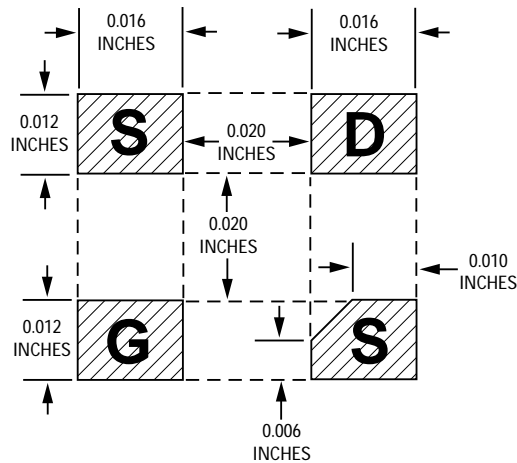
Suggested Printed Circuit Board Pad Layout for 1.2 mm by 1.4 mm Mini-Pak
